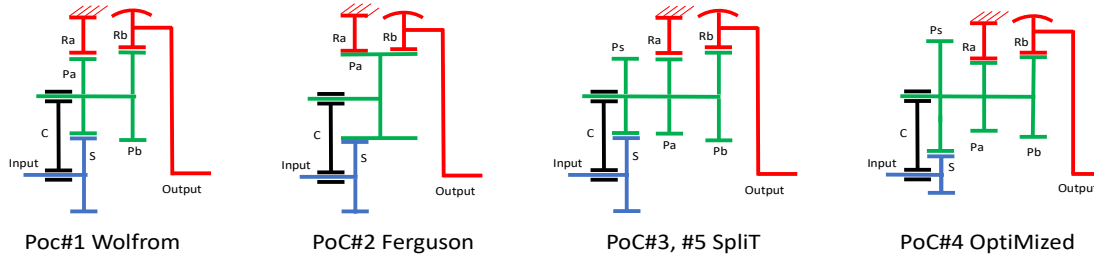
Configuration of the five PoC gearboxes. "S" = Sun gearwheel, "P" = Planet gearwheel, "R" = Ring gearwheel, "C" = carrier element, "a" = first gearbox stage, "b" = final gearbox stage, "s" = pre-stage.
